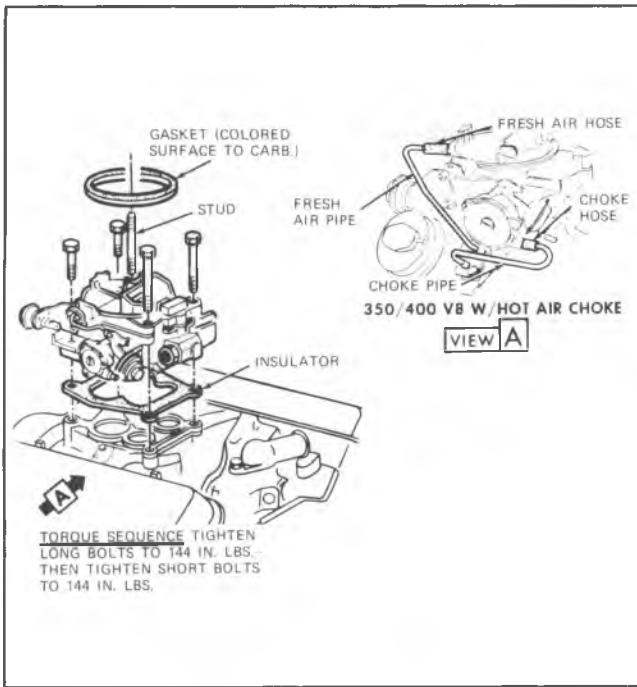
Carburetor and Choke Pipes - V8, 4Bbl.
